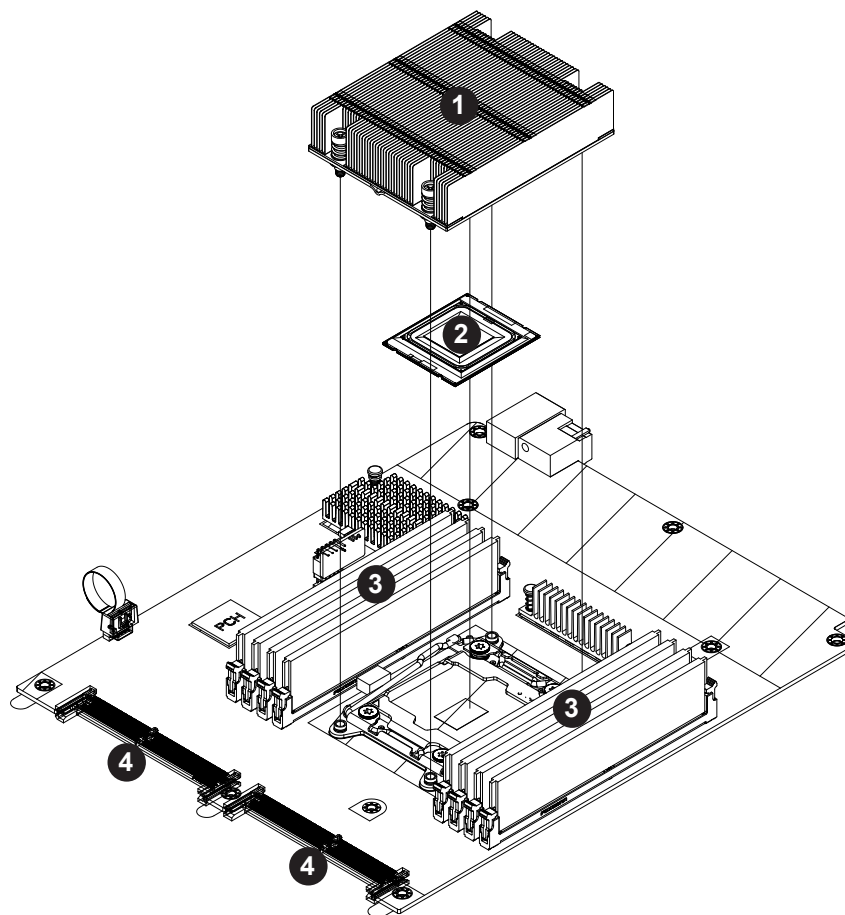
Exploded View of the SBI-6119R-C3N/T3N Blade Modules
